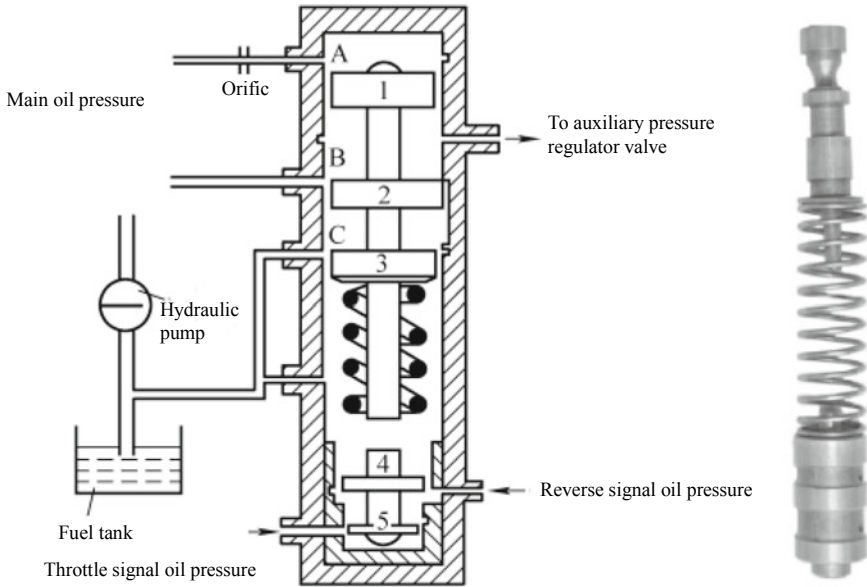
Structure of main pressure regulator valve. A—Oil inlet of signal oil pressure, B—oil inlet to auxiliary pressure regulator valve, C—drainage port
